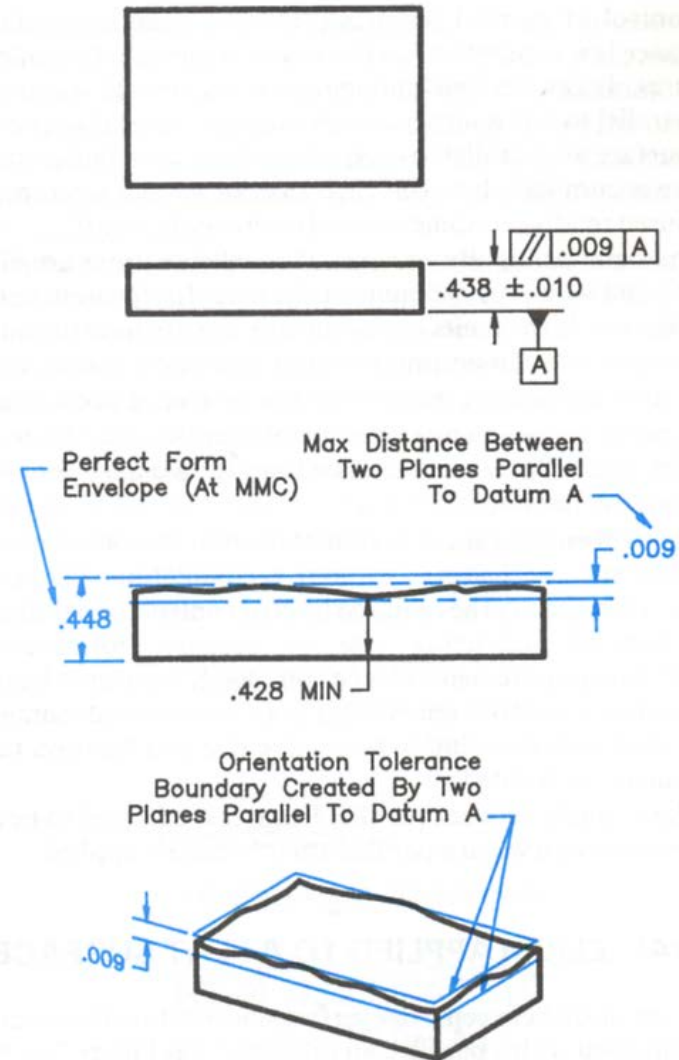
Two planes form the boundary for a parallelism tolerance.
